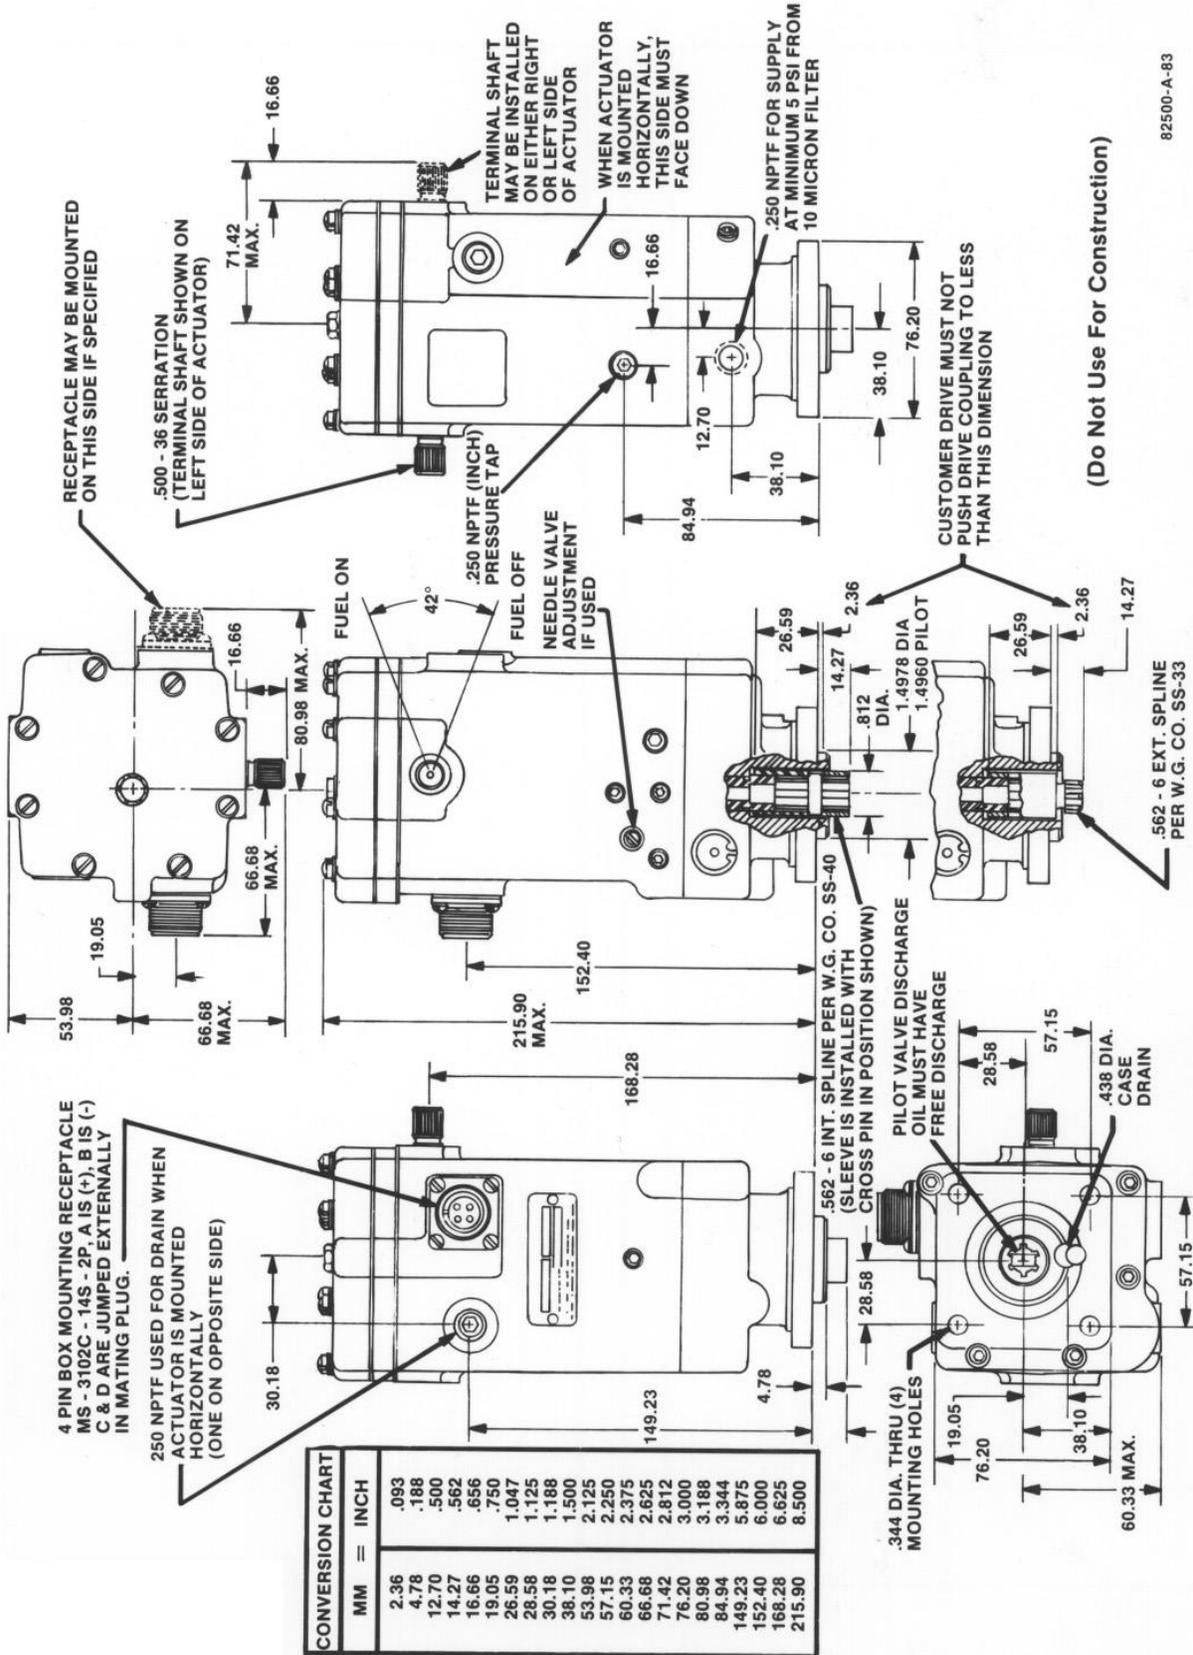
Outline Drawing of Typical EG-P Actuator (Oil Pump Model)
